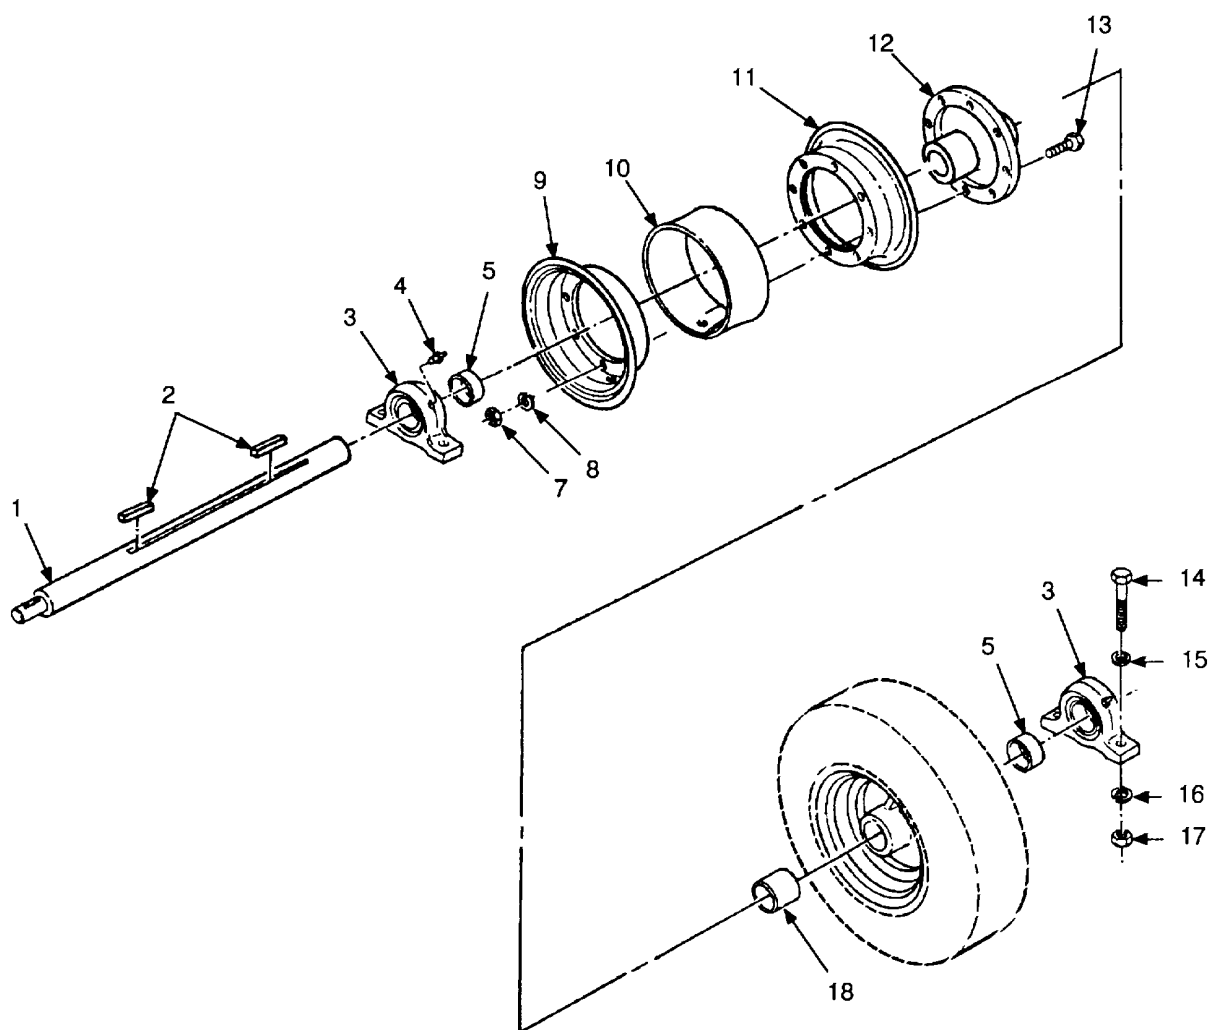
TRACTION WHEEL ASSEMBLY AND RELATED PARTS.
